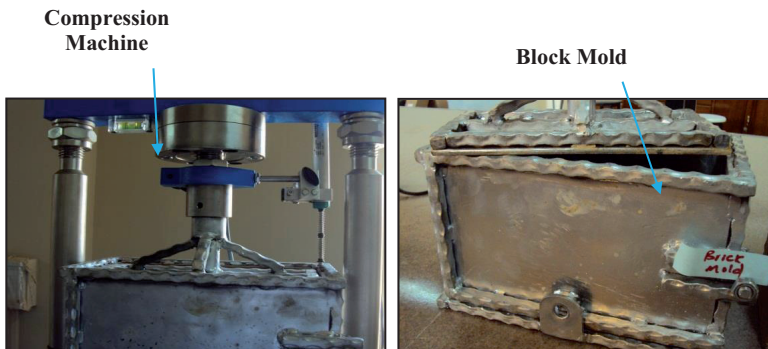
Photographs of the fabricated mold and the details of the pressing setup
